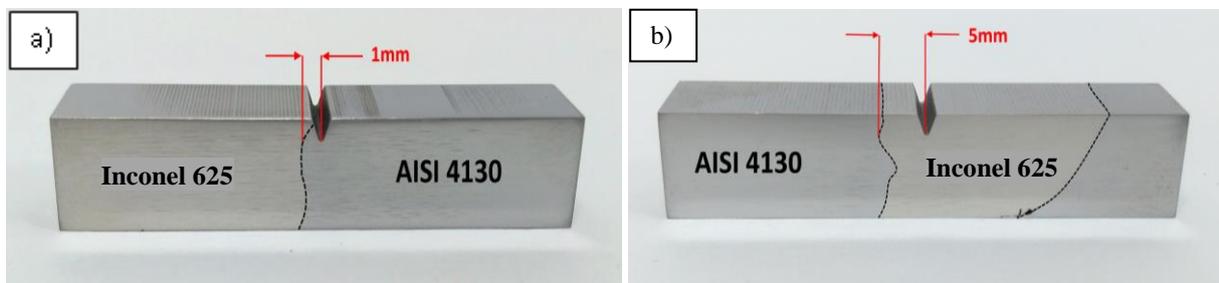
Test specimens for charpy assays: a) notch near the melting line, b) notch in the weld metal
